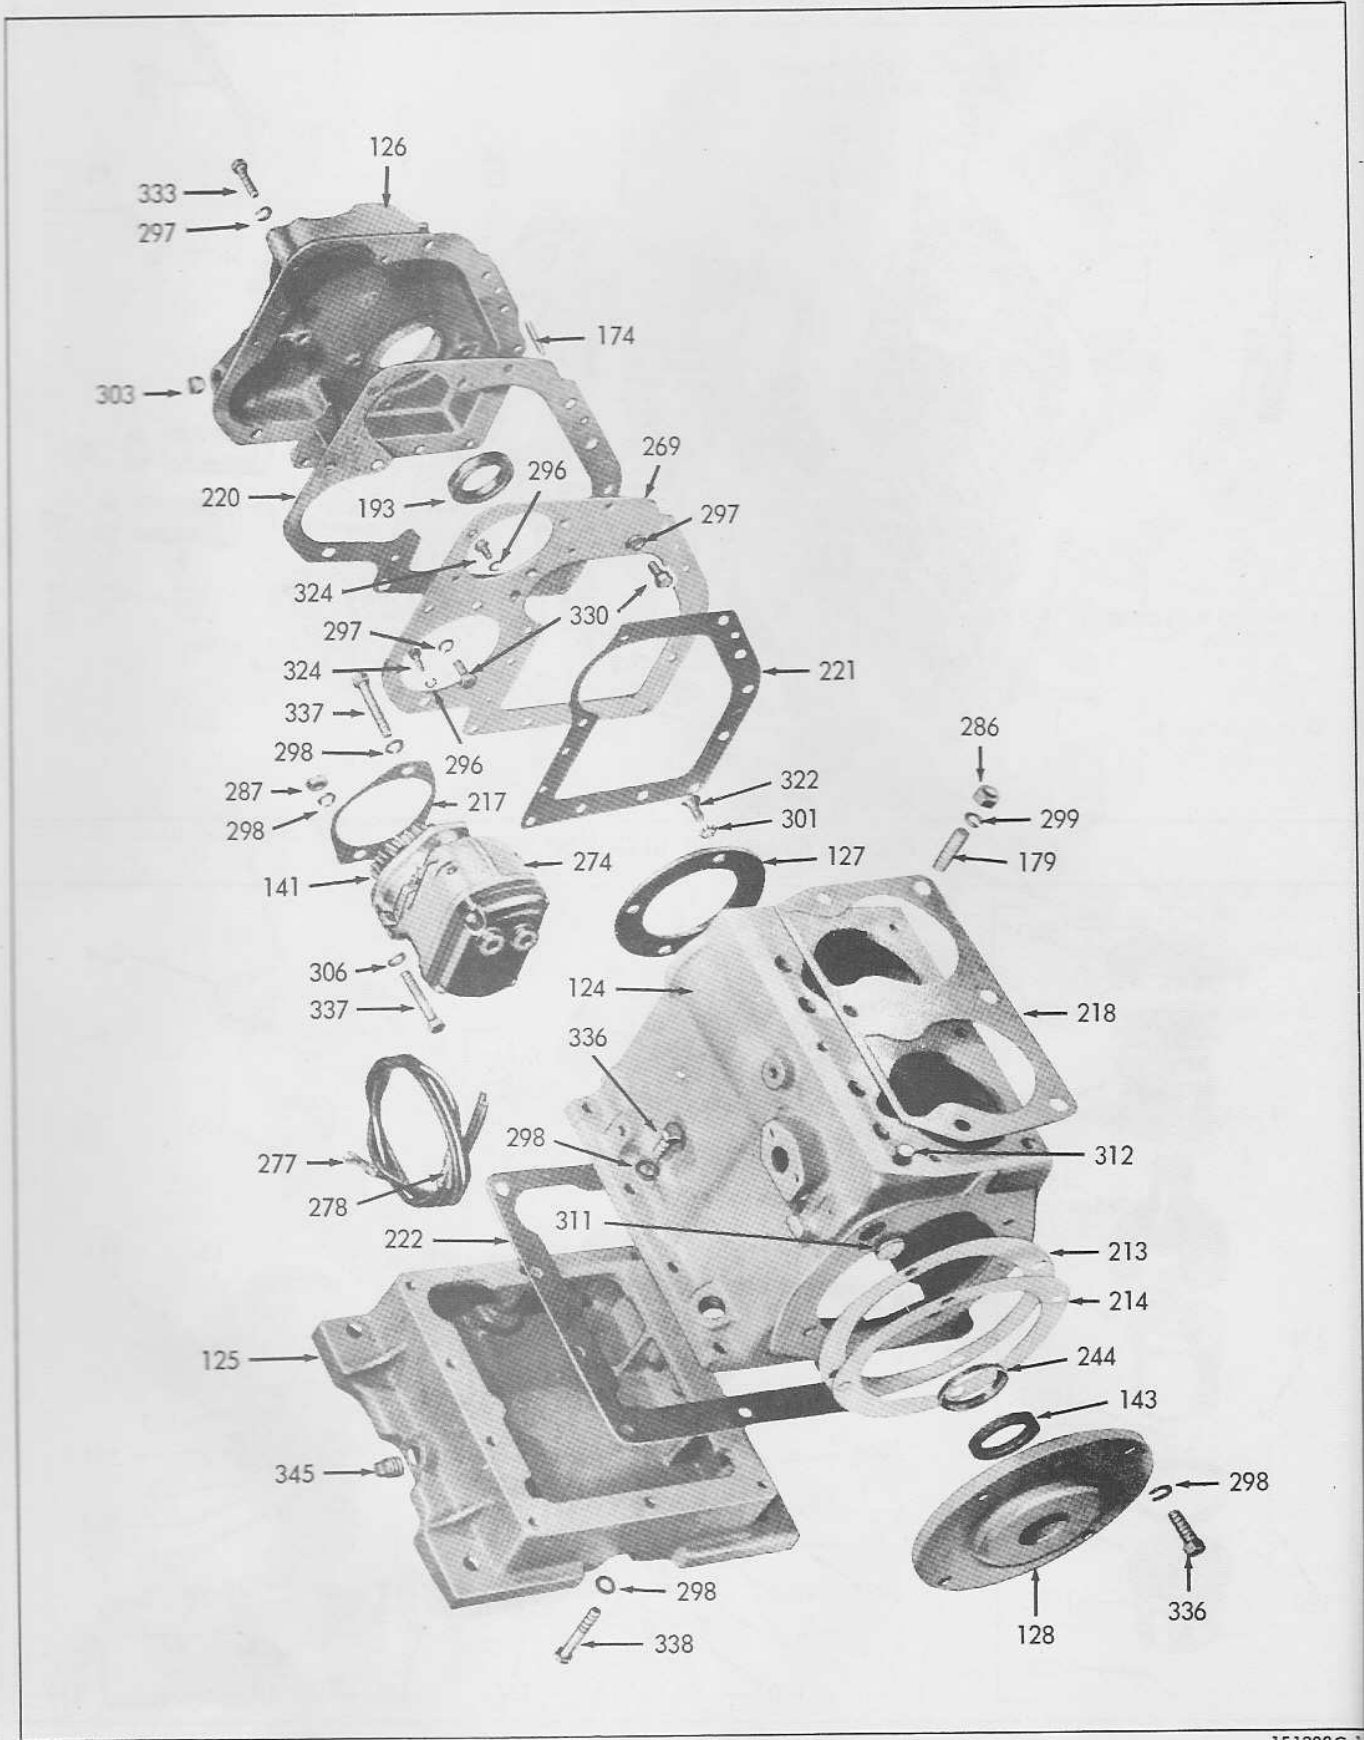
, CRANKCASE, GEAR COVER, BASE AND MAGNETO GROUP
